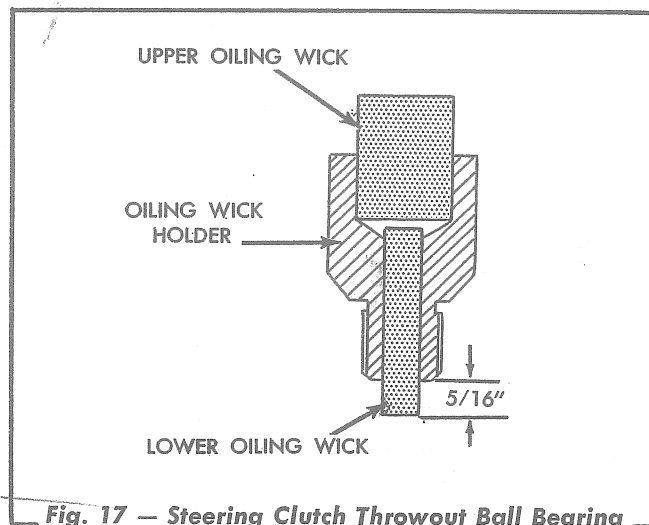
Steering Clutch Throwout Ball Bearing Oiling Wicks and Wick Holder
